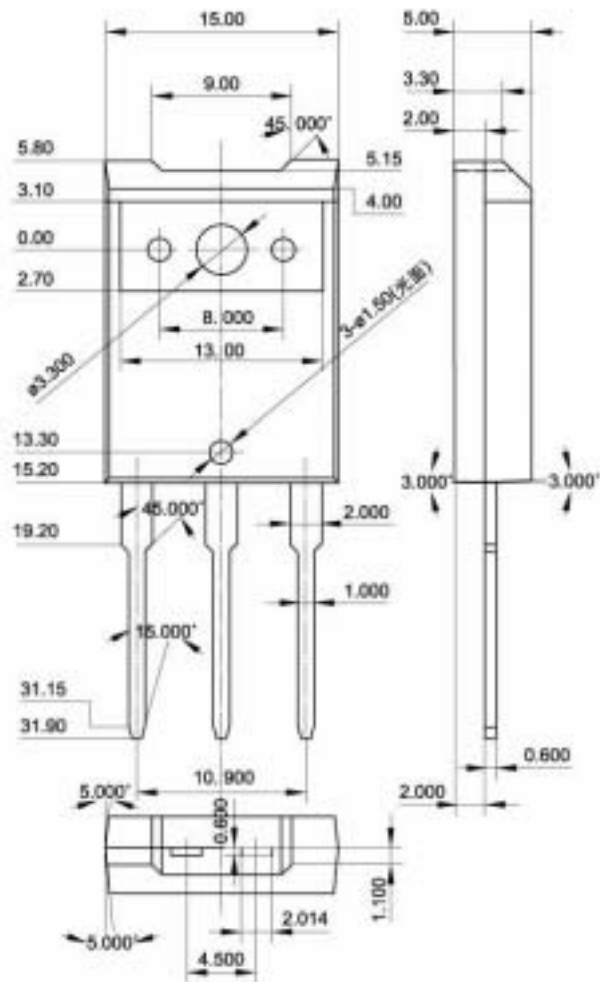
Outline dimensions (unindicated tolerance:  $\pm 0.30\text{mm}$ )
